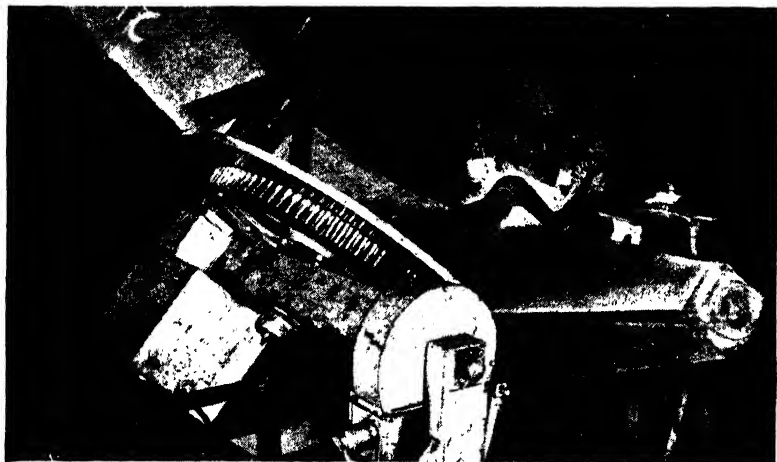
If a first-class aircraft welding operator, for example, were to be asked to weld this large structural-steel earth-moving machine part as it is normally welded, the job would be so specialized and so different from aircraft welding that the aircraft welding operator would require practice and training to do satisfactory work. (*Courtesy of R. G. LeTourneau, Inc.*)
